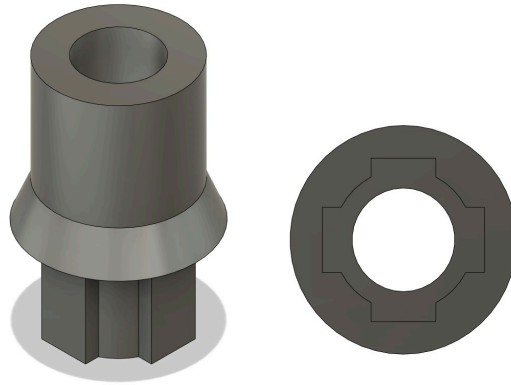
Removable Spacer Isometric View (left) and Bottom View (right)
